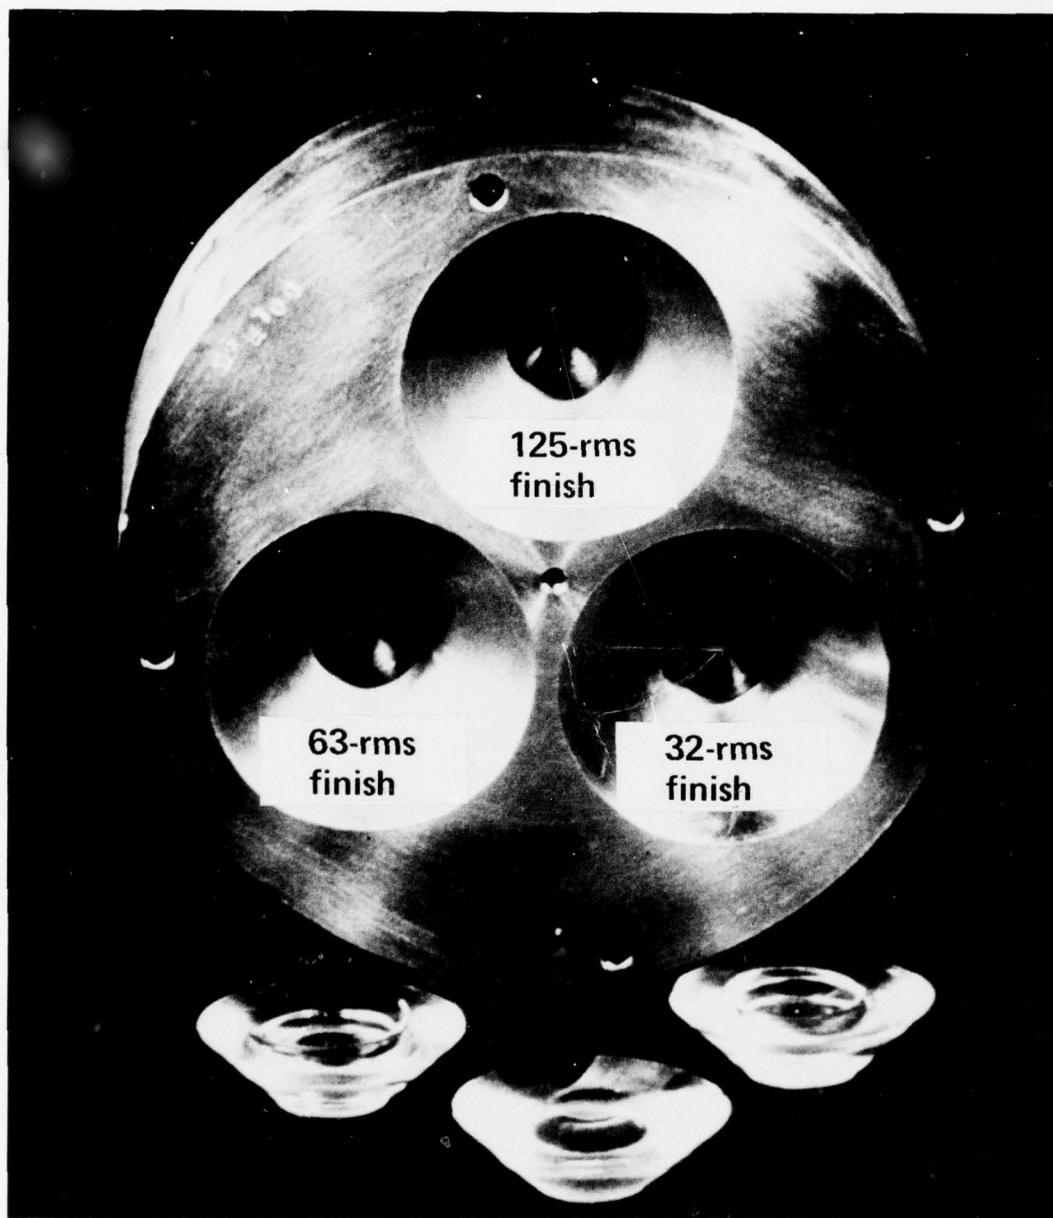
Test fixture used to evaluate the effect of the flange seat surface finish on the initiation of cyclic fatigue cracks in conical bearing surfaces of conical frustums.
